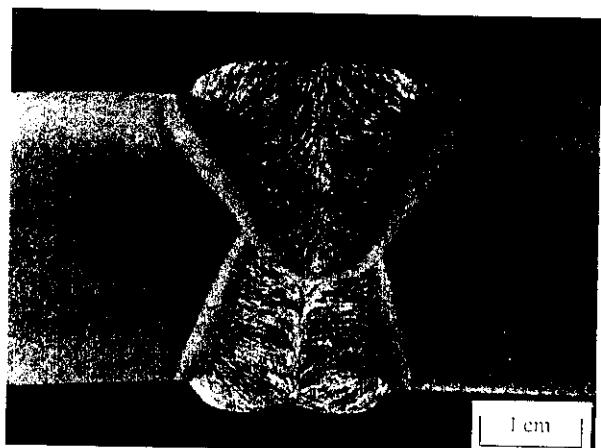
Cross section of welded joint of spiral pipe with 30-mm wall thickness, 1100-mm outside dia. and 11-m length
